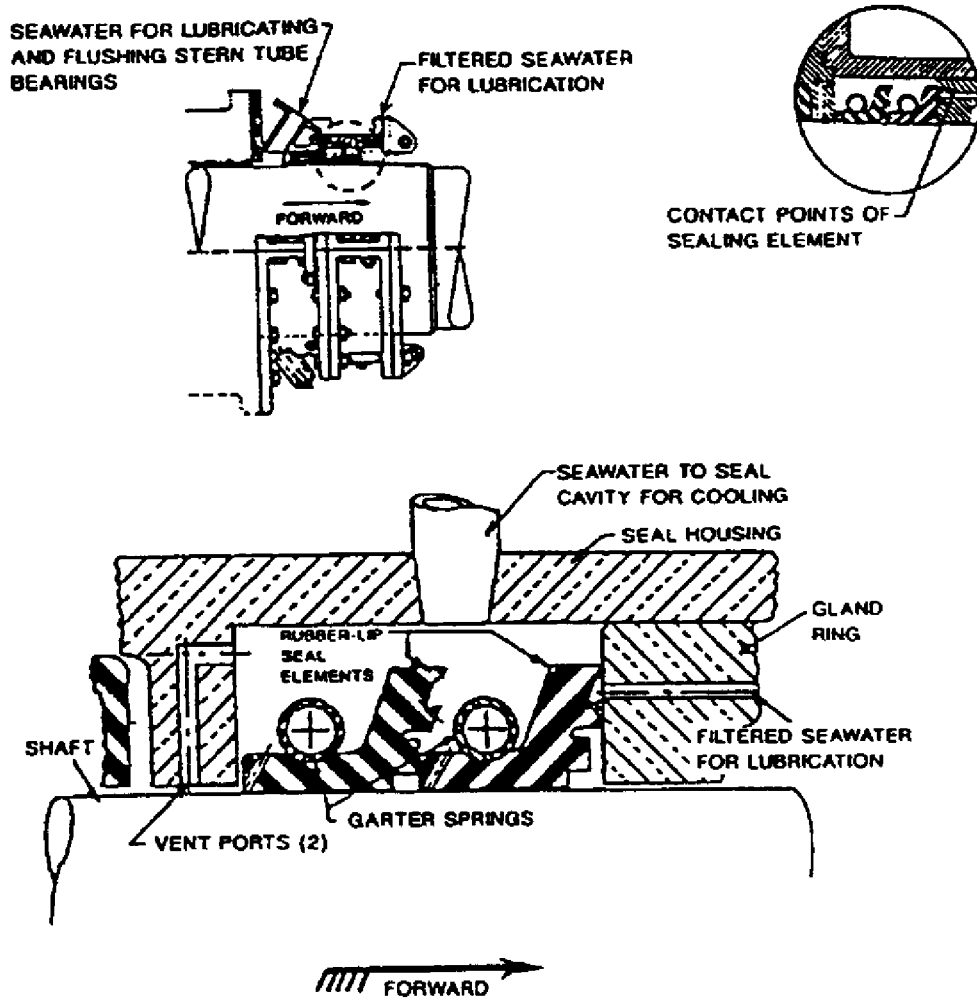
Syntron Rubber-Lip Stern Tube Shaft Seal
